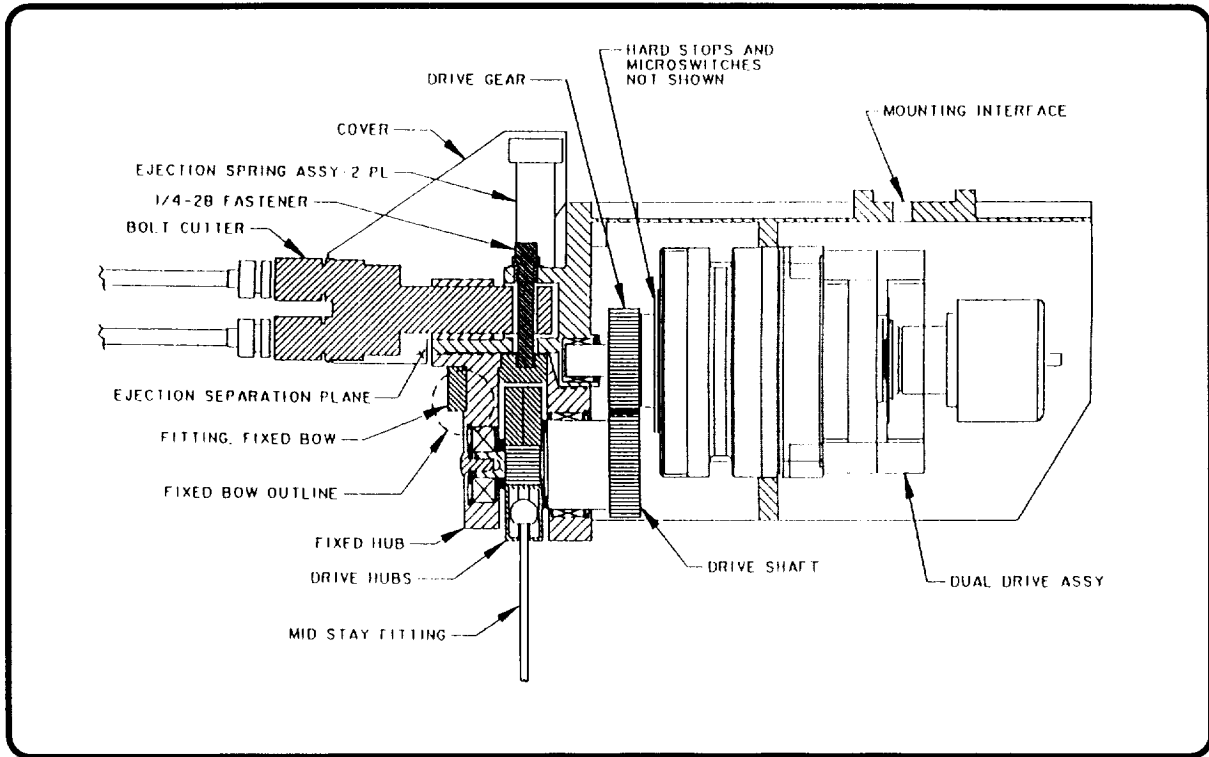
CROSSSECTION VIEW OF DRIVE MECHANISM
